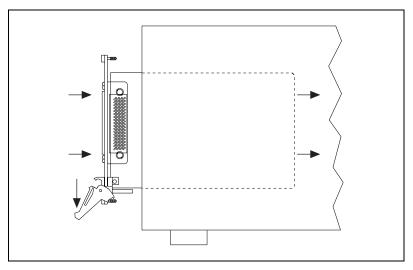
Injector/Ejector Handle Position during Module Insertion
